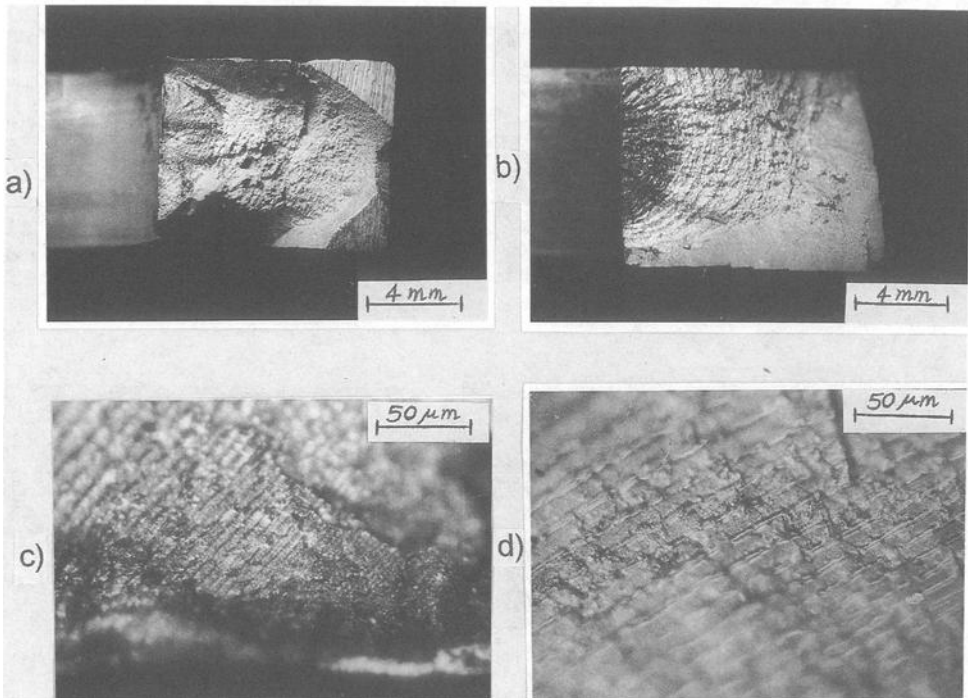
Typical fractographs from constant amplitude stress intensity calibration tests: (a,b) macro photograph of fracture surface; (c,d) optical fractographs.
